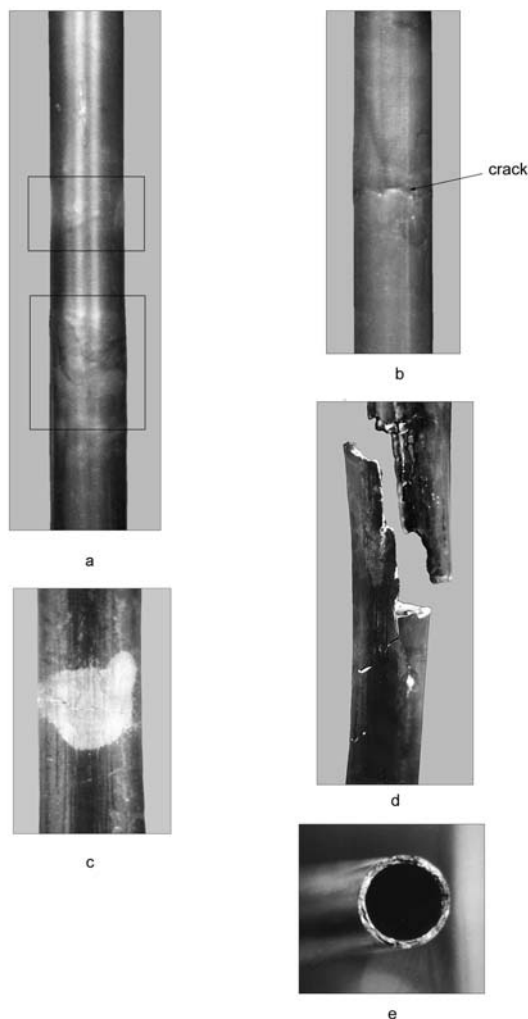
Secondary damage of the fuel rod claddings: a) local diameter increase; b) crack; c) hydride spot; d) fracture of cladding; e) breakaway of the upper plug
